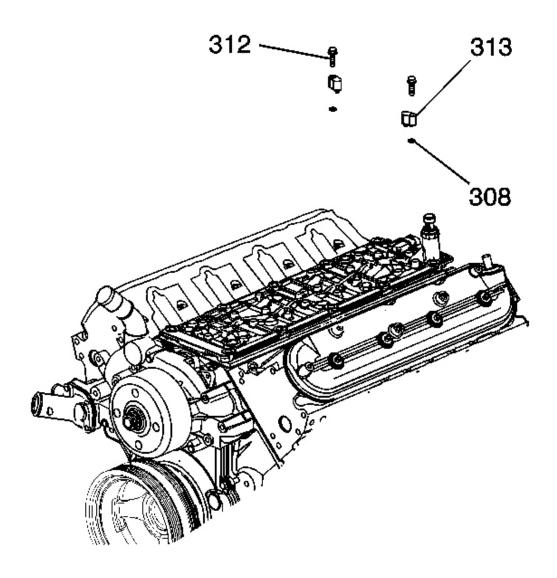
Engine Coolant Air Bleed Cover Bolts Courtesy of GENERAL MOTORS CORP.
